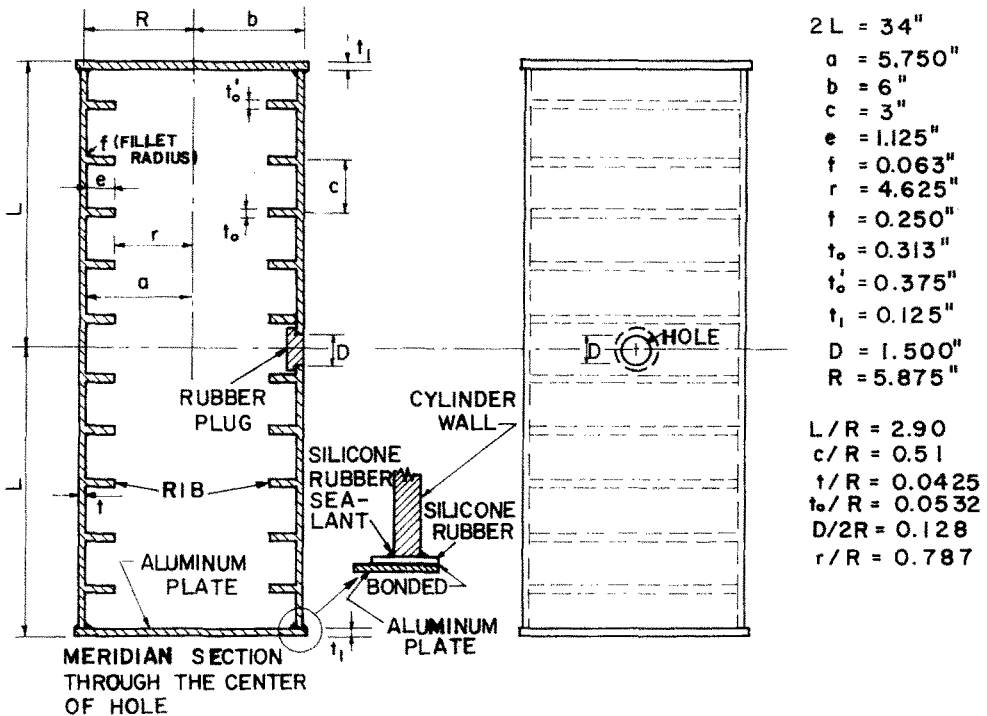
Geometry of the epoxy perforated ribbed cylinder.
